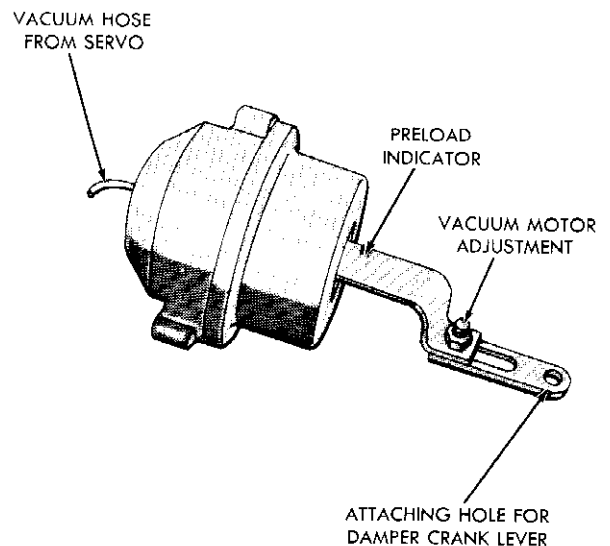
Vacuum Motor Link Adjustment—(61LM-7818)
